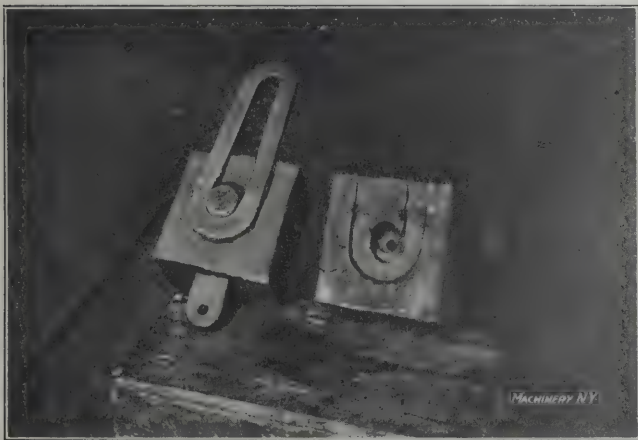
Die used in Welding the Ends of Swing-hangers
